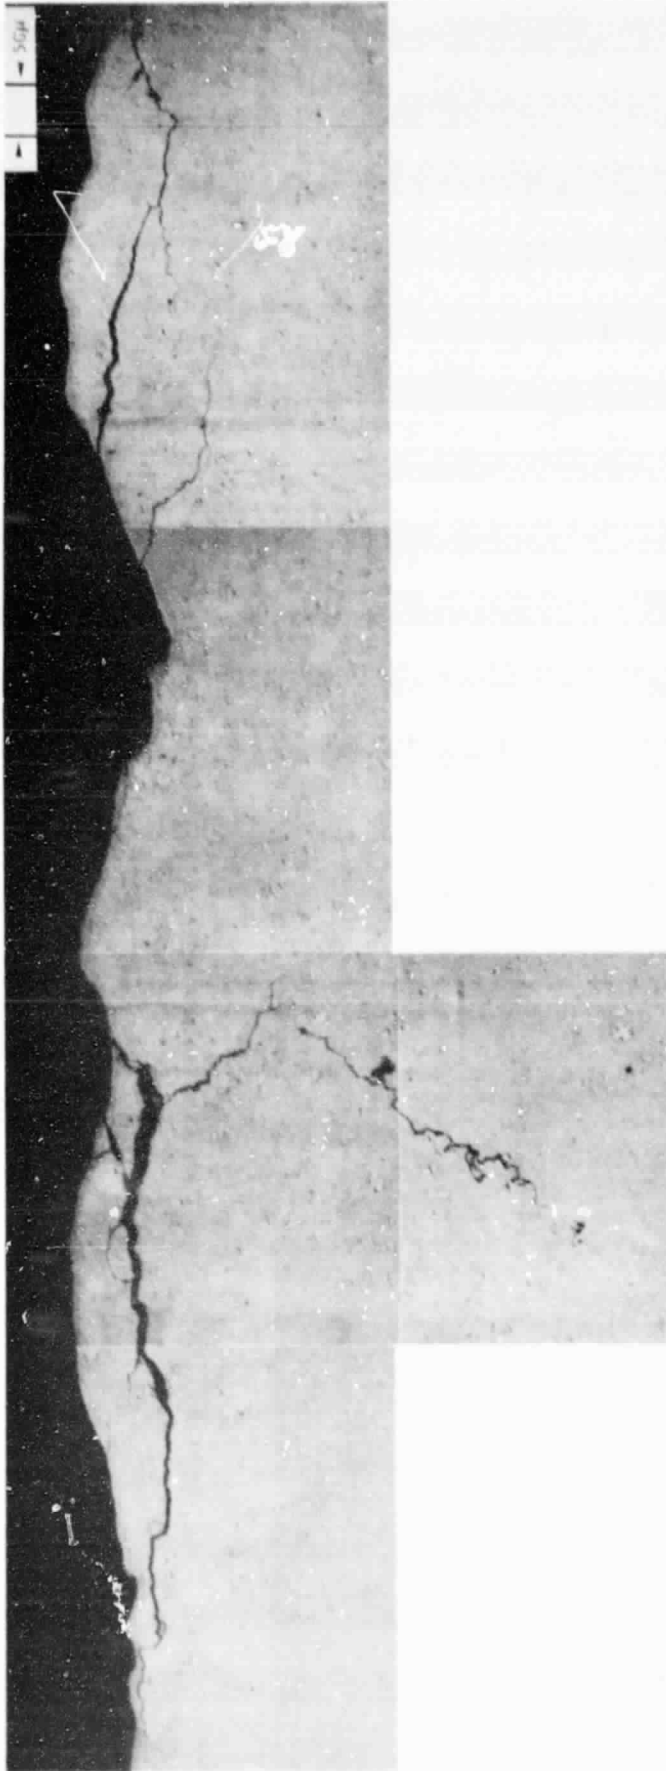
Cracks in spalled ball from HPOTP 9008 bearing in Engine 2502.
